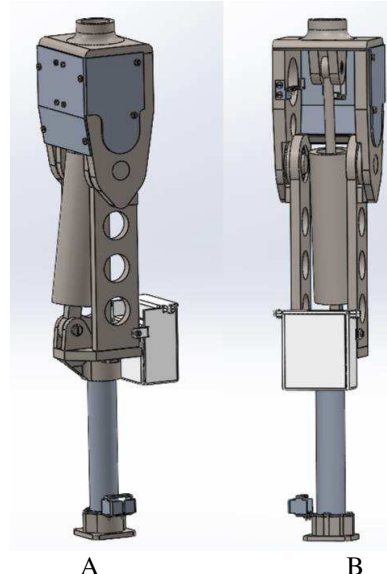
Optimized design of the lower (A) and upper (B) frames of the artificial knee joint
